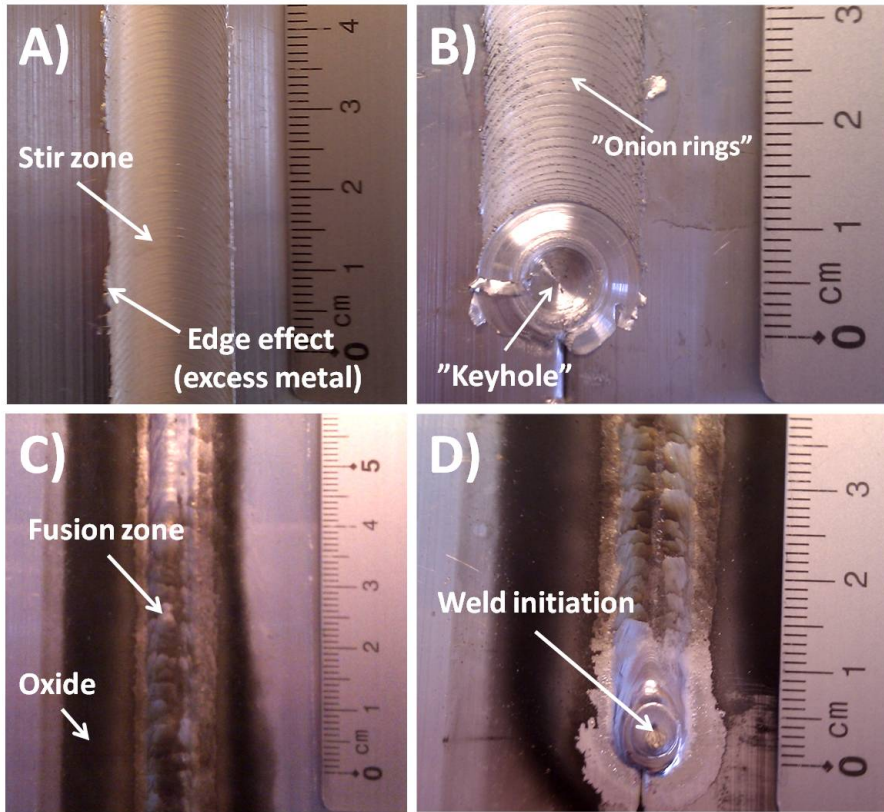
Macro images of weld seams after FSW and MIG welding of alloy 6082-X / T6 prior to corrosion testing. A) weld seam after FSW, B) weld initiation point for the FSW process often referred to as the “keyhole”, C) weld seam after MIG welding (note the pronounced dark oxide layer) and D) weld initiation point after MIG welding.
